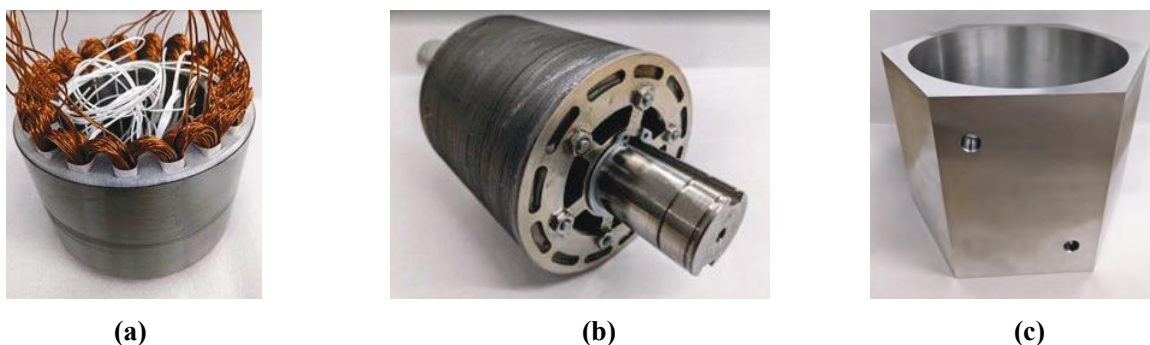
Views of fabricated components of prototype IMD unit. (a) Assembled machine stator. (b) Assembled SIPM rotor. (c) Aluminum IMD housing showing hexagonal outer mounting surfaces for current source power converter and water coolant inlet/outlet ports
